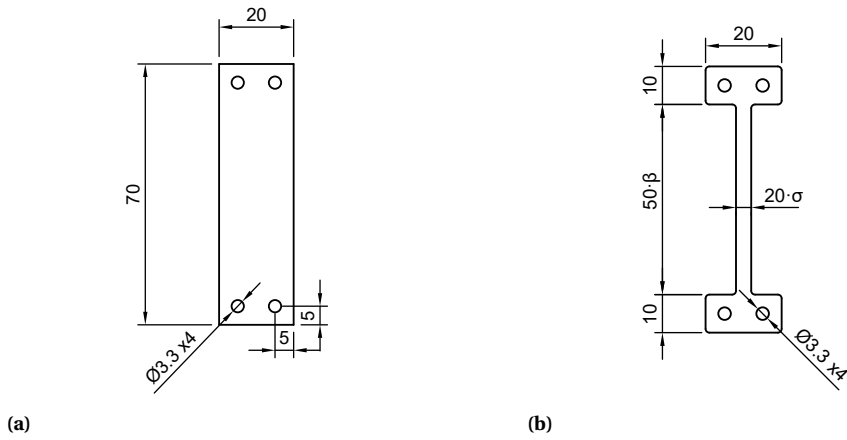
Technical drawings and dimensions of constant (a) and variable (b) flexures
